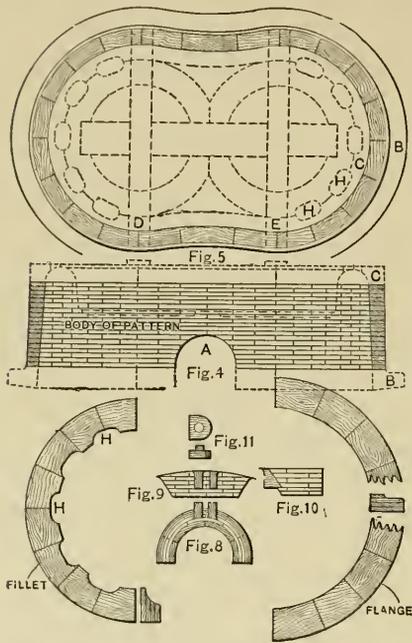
Body of Pattern, Flange, Fillet Piece and Details
